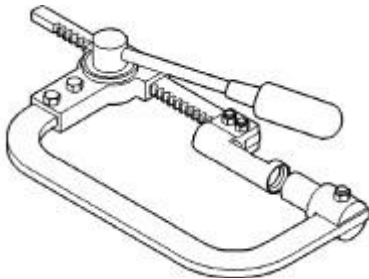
COMPRESSOR, VALVE SPRING - C-3422-D
